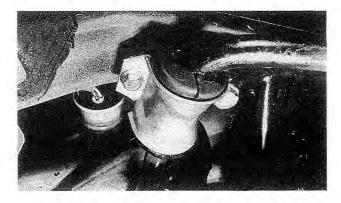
Brackets and rubber bushings mount stabilizer bar to front suspension subframe.
